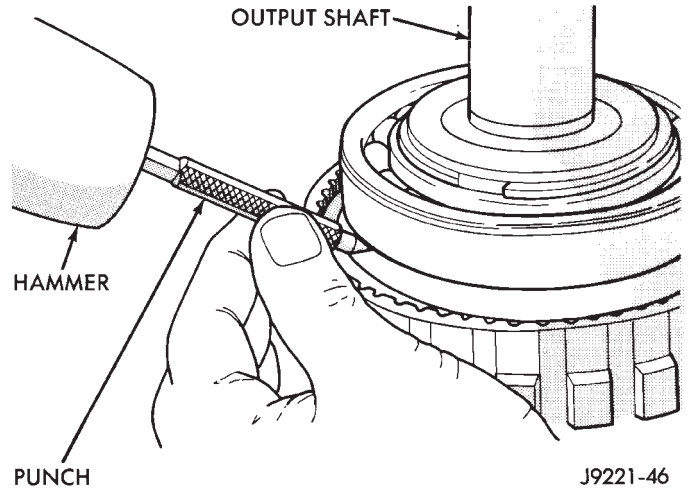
Marking Annulus Gear And Output Shaft For Assembly Alignment
